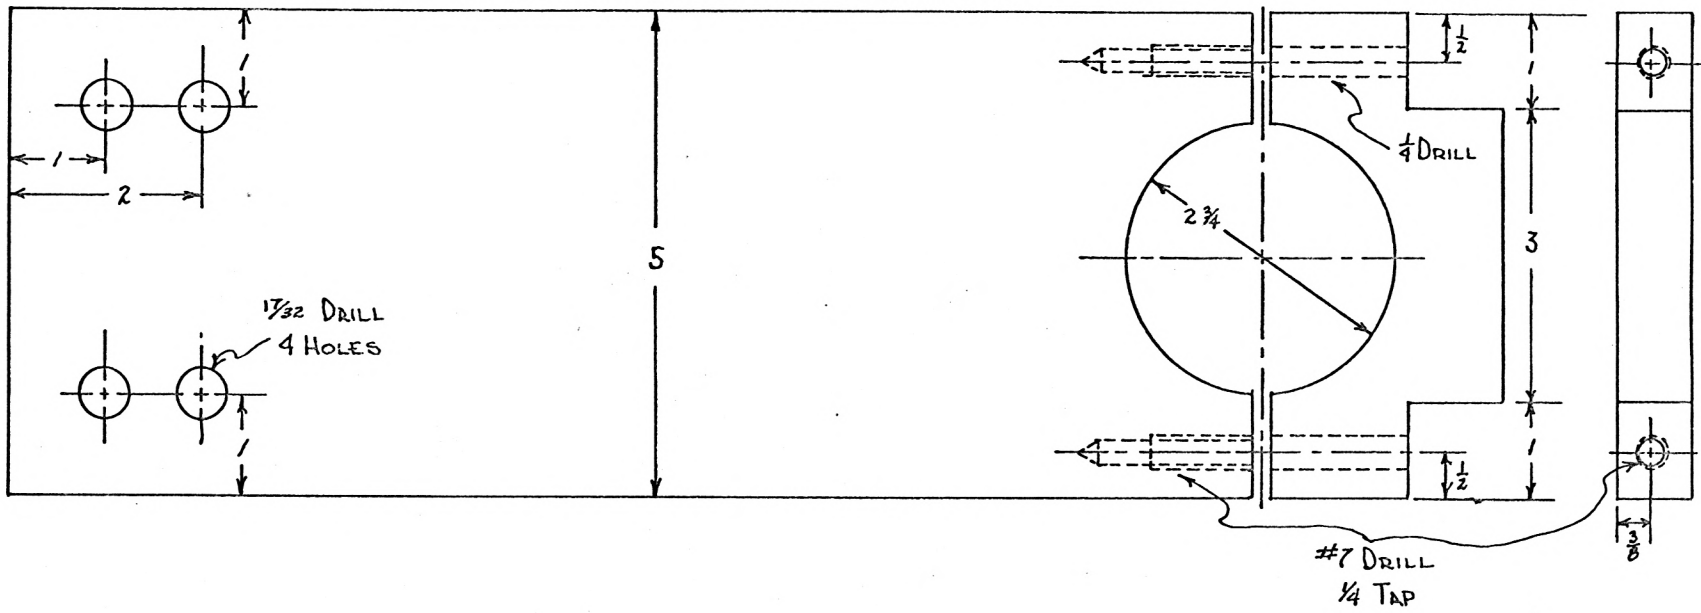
Engine Mounting Stand, 160 lb Rocket Engine.
